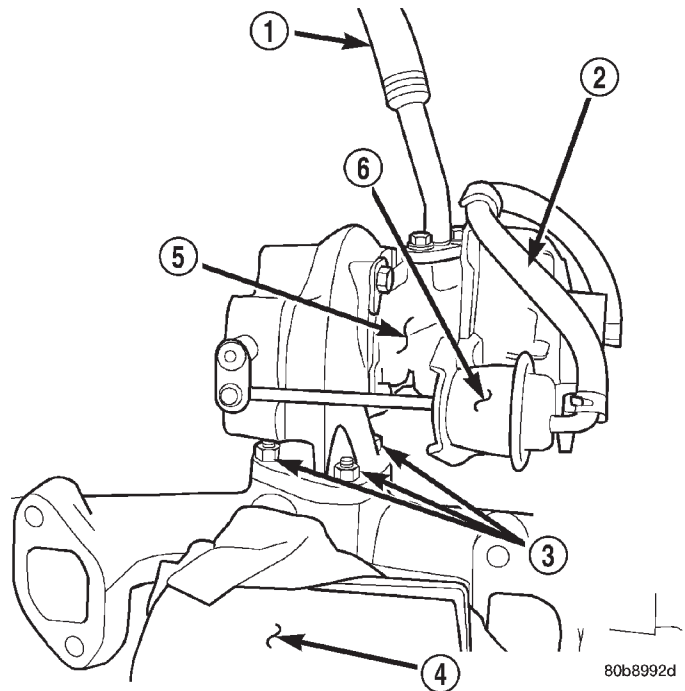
Turbocharger / Exhaust Manifold Assembly
